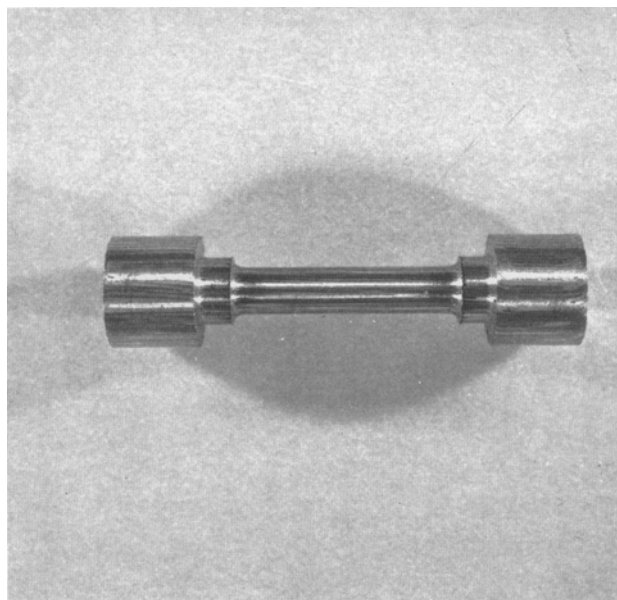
Machined tensile specimen used in this investigation. Magnification 1.3 times.
